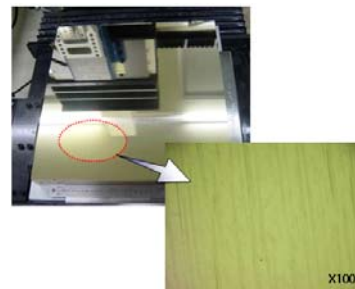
Machining surface after flatness using R10(mm) shaping tool
